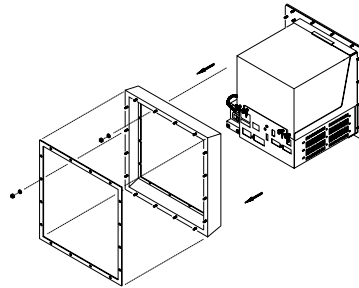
PanelMate 2000 Grayscale Keypad Unit (Model 2600) Mounting Collar Assembly
